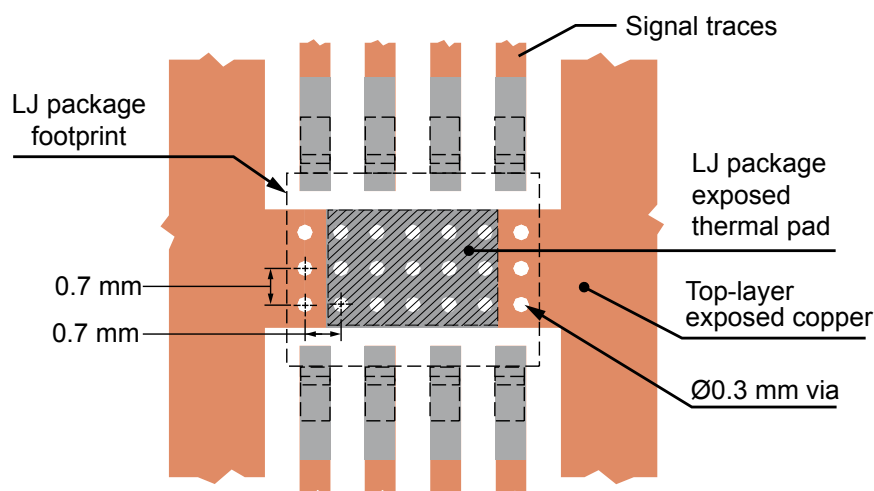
Suggested PCB layout for thermal optimization (maximum available bottom-layer copper recommended)
